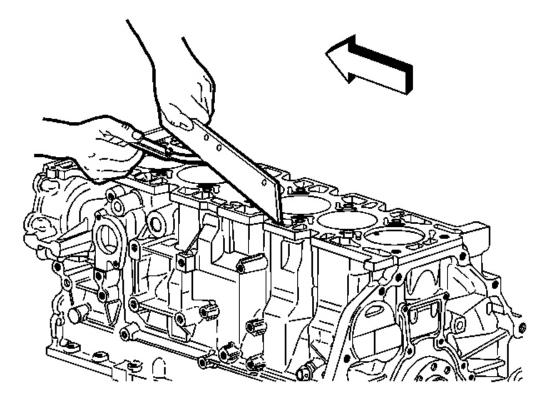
Cleaning Sealant From Gasket Mating Surface Courtesy of GENERAL MOTORS CORP.
